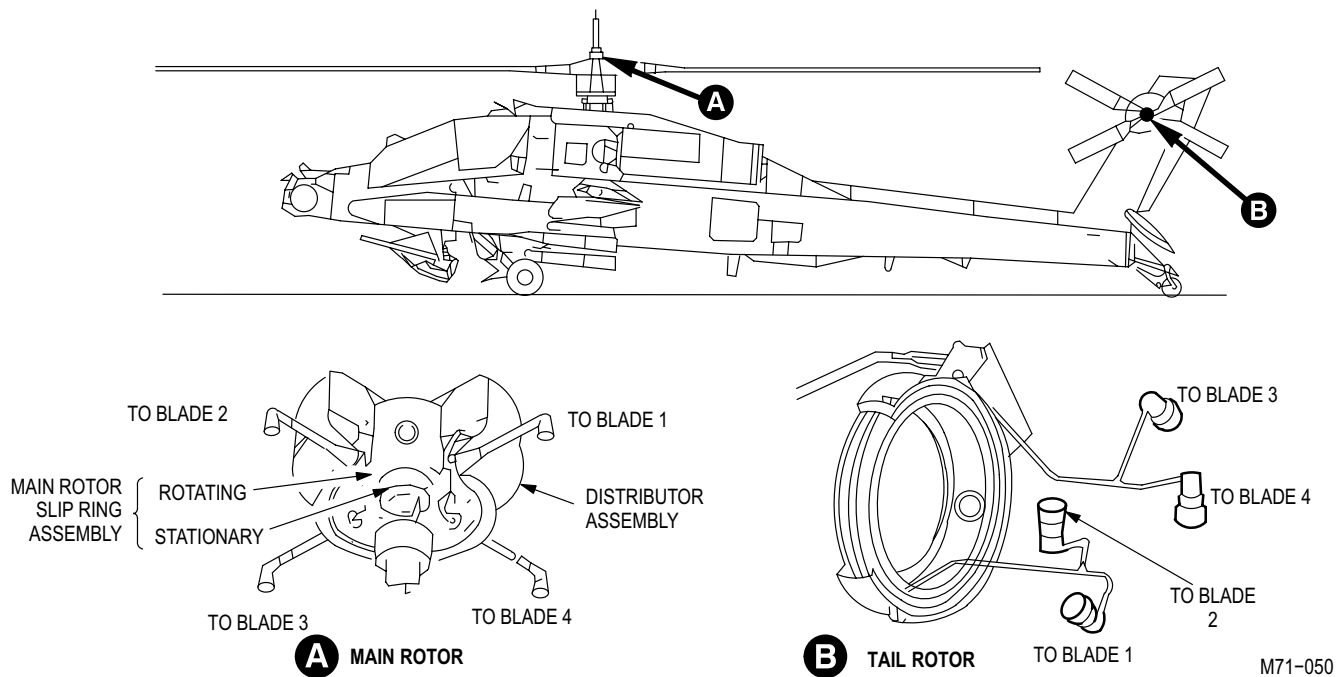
Slip Ring Assemblies and Main Rotor Distributor Assembly Location
